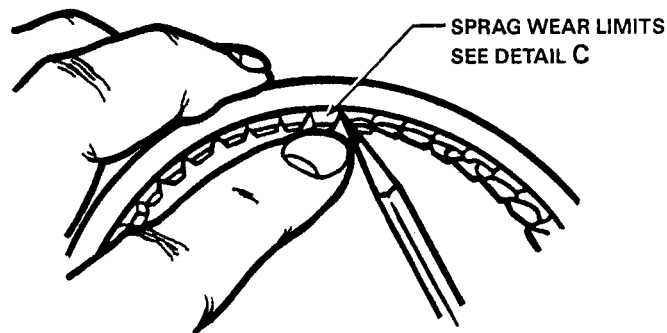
Freewheeling clutch inspection (Sheet 1 of 3)
